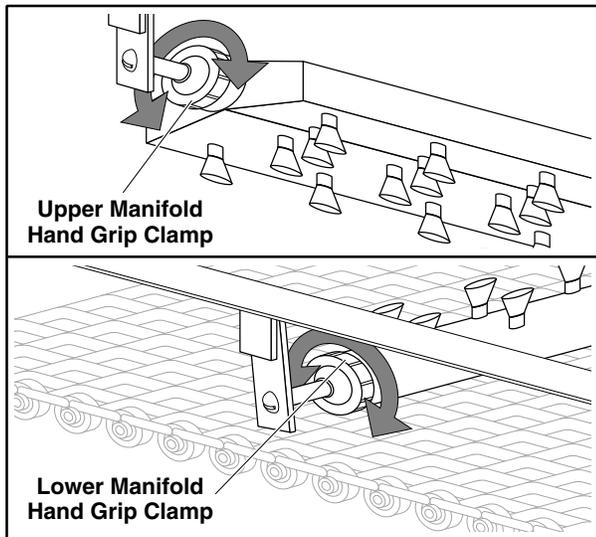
Scrapper Spray Manifold Hand Grip Clamp
